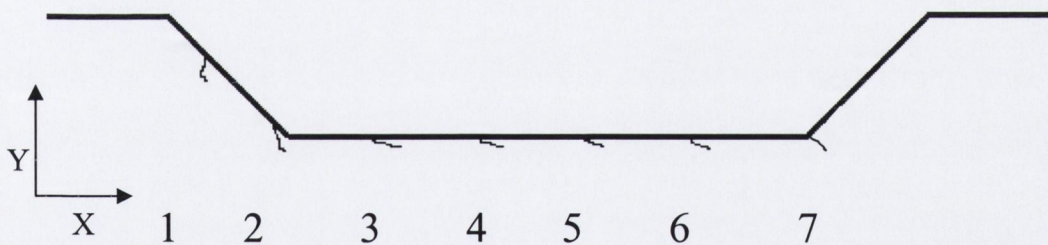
Illustration of the appearance of defects due to lapping in the first groove of the workpiece over 3.5 rotations.
